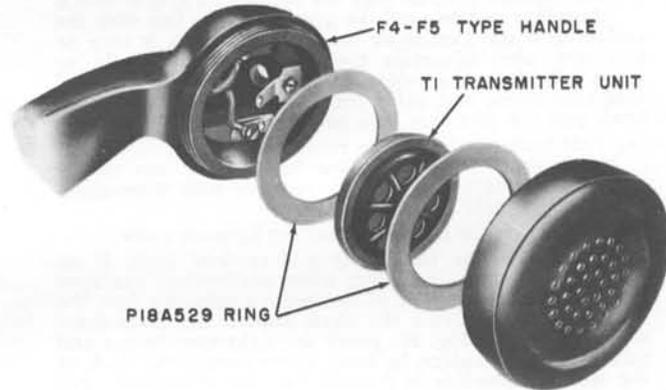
F4- and F5-type Handset, Order of Assembly of the T1 Transmitter Unit Rings and Cap
